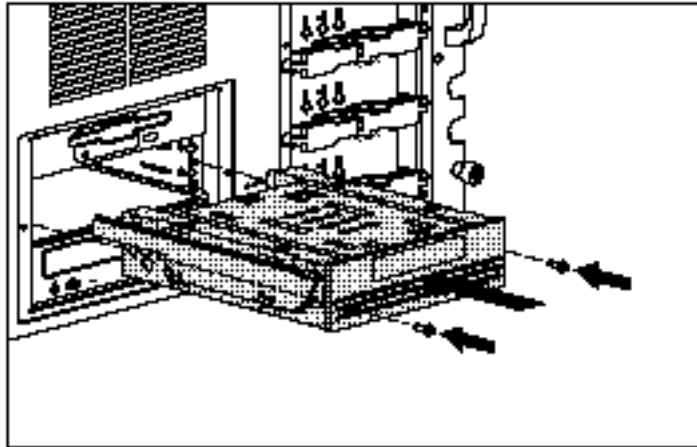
17. Installing a DAT tape drive in drive bay 6
